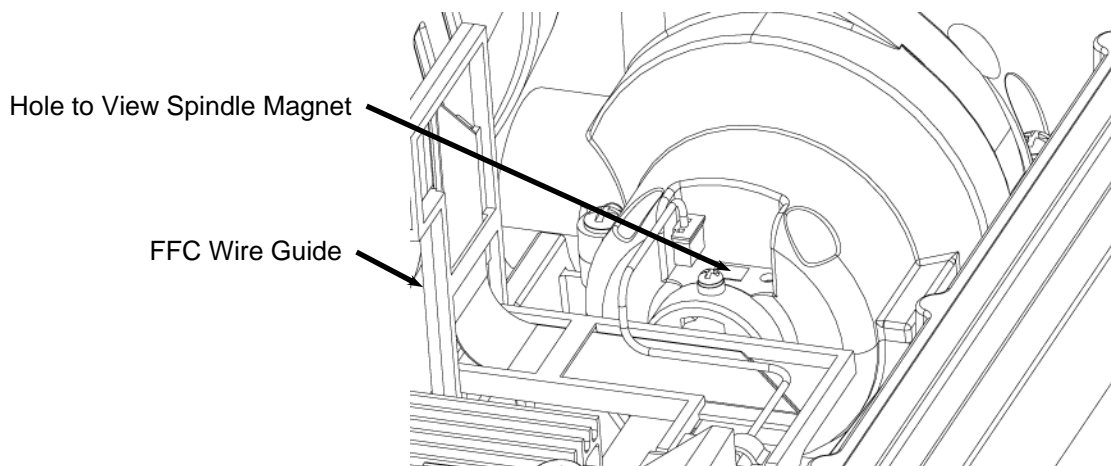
VERIFYING THAT THE MAGNET IS IN PLACE
